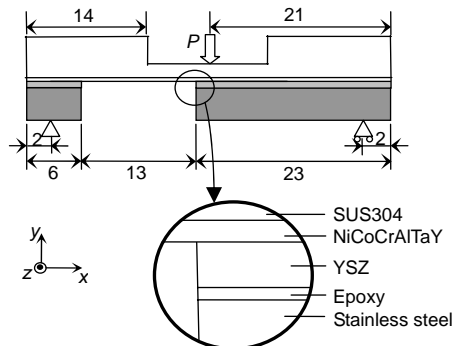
Shape and size of the grooved modified three-point bending specimen (unit: mm)
